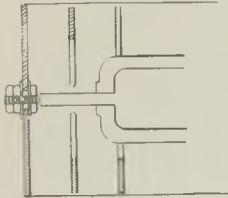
METHOD OF ANCHORING CORE FIRMLY.
